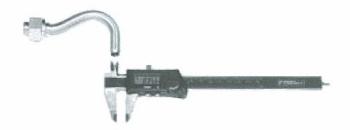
Illustration of Using Dial Caliper for Measuring Inside Diameter of Nozzle
